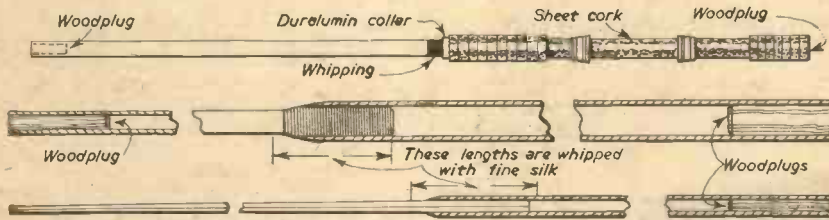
The three joints showing the unshaped cork handle and the top and middle joint splices.
